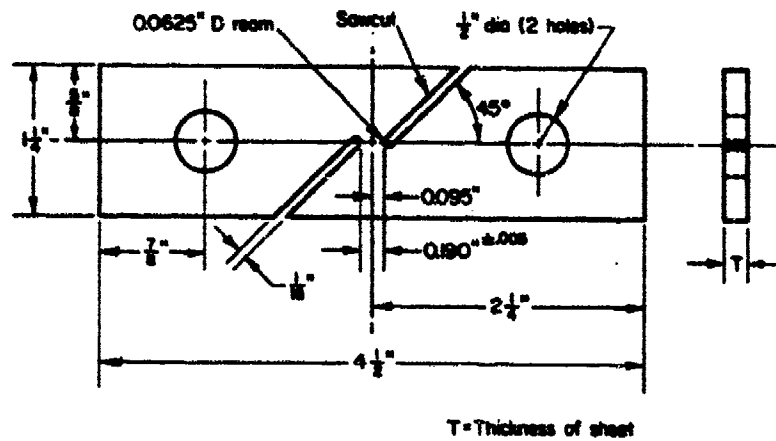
Tension-shear specimen for Inconel 625 sheet.
